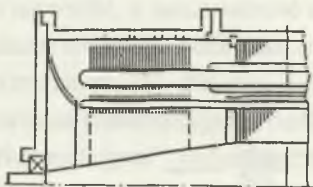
Electric machine with heat pipes inserted into its inner part near the stator end winding
